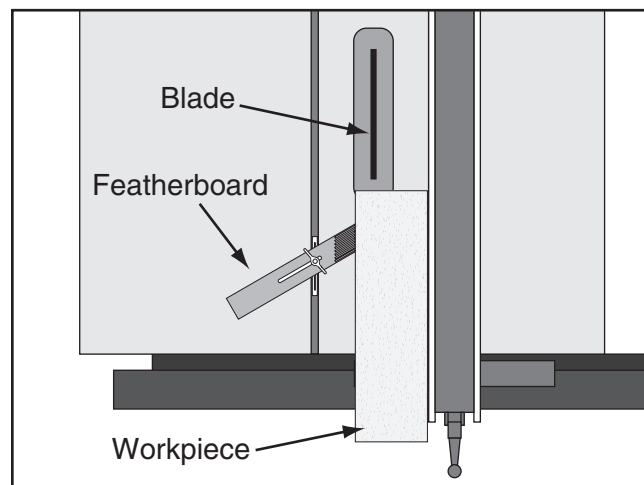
Featherboard installed in miter slot and supporting workpiece for ripping cut.
